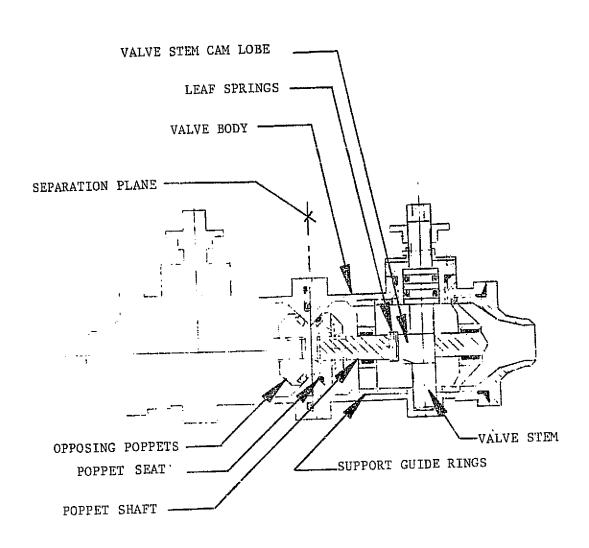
CUTAWAY SIDE VIEW OF PID
